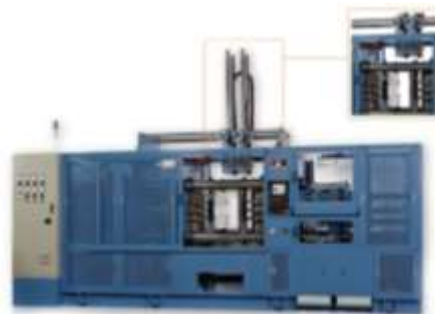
Horizontal type of rubber injection moulding machine. Photo from Pan Stone Hydraulic Indus. Co. Ltd.
